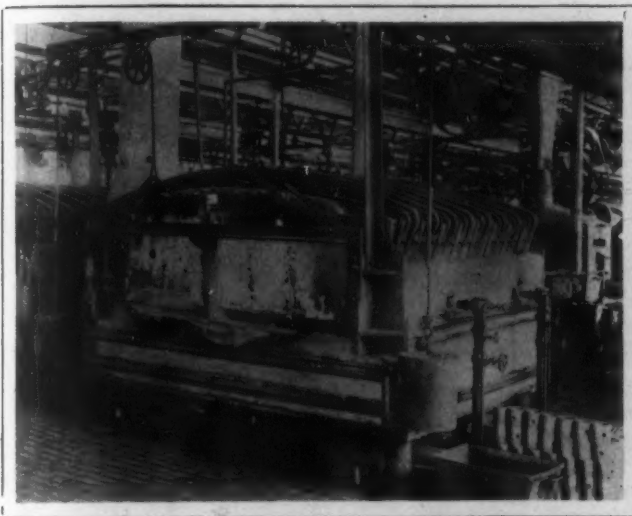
View of the Type of Furnace Used for Heat Treatment of Forgings as Well as for Carbonizing Treatment
